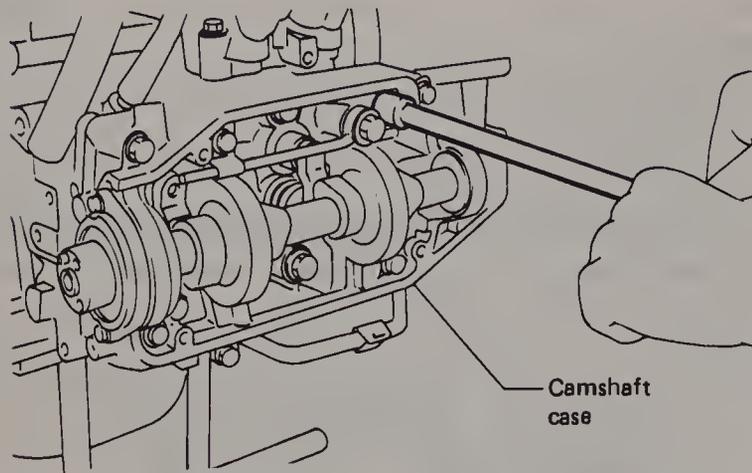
The camshaft case and camshaft come off as an assembly (Sec 5)
